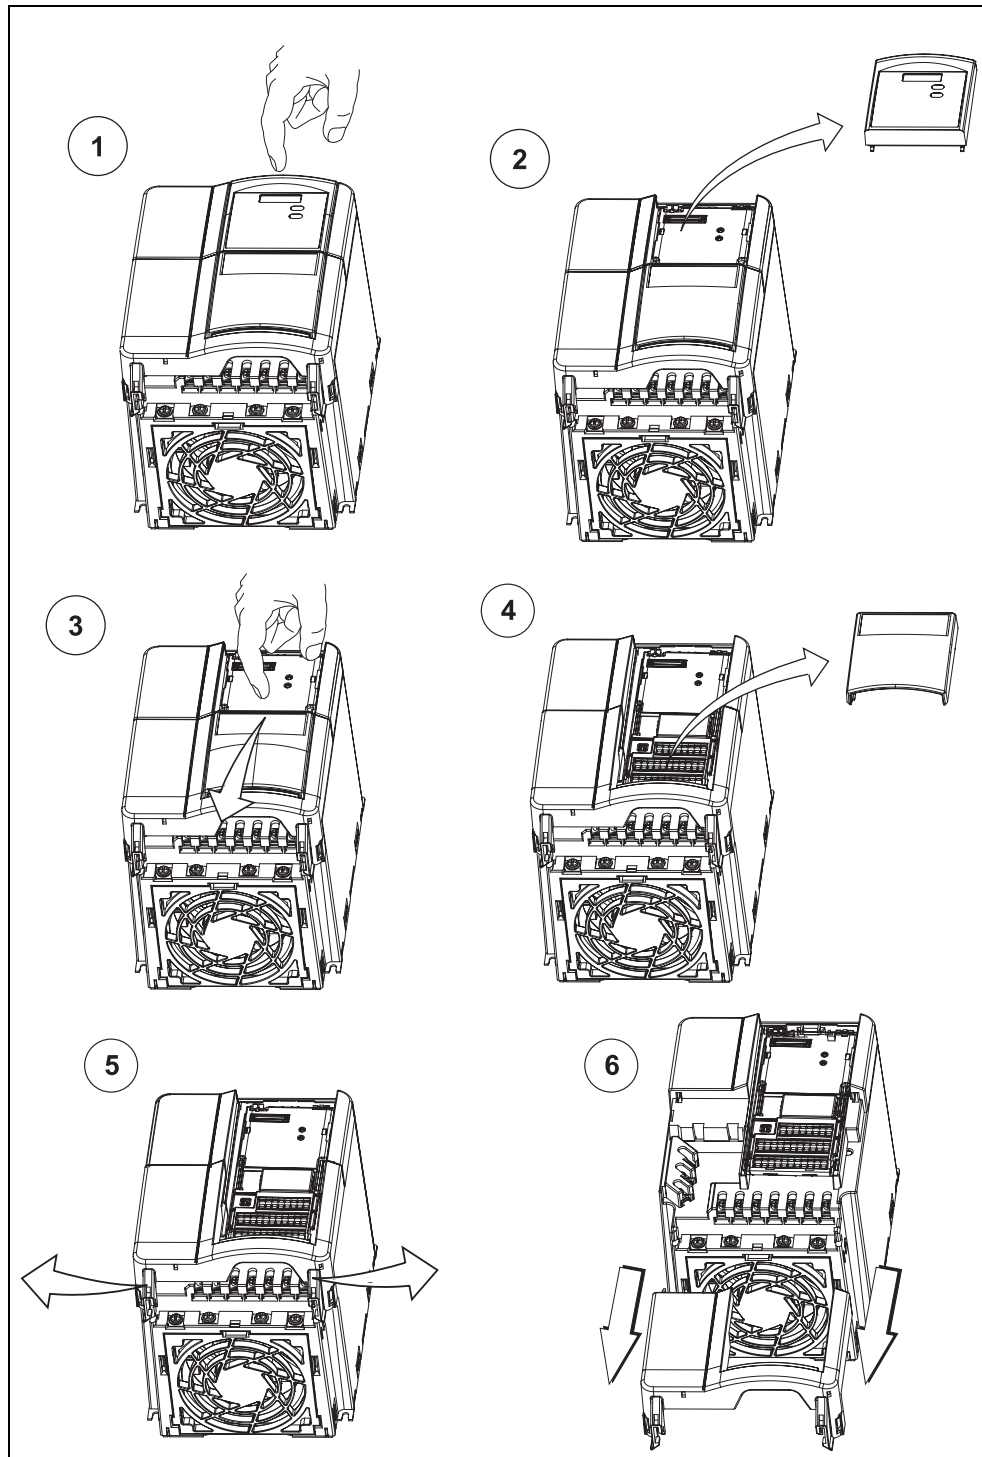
Removing front covers (Frame Sizes B and C)
